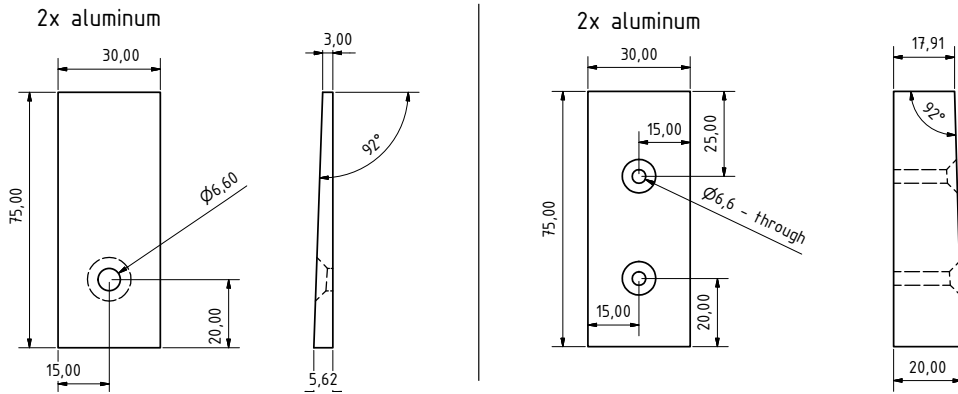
Drawing of the feet for the TFE baffle assembly.
